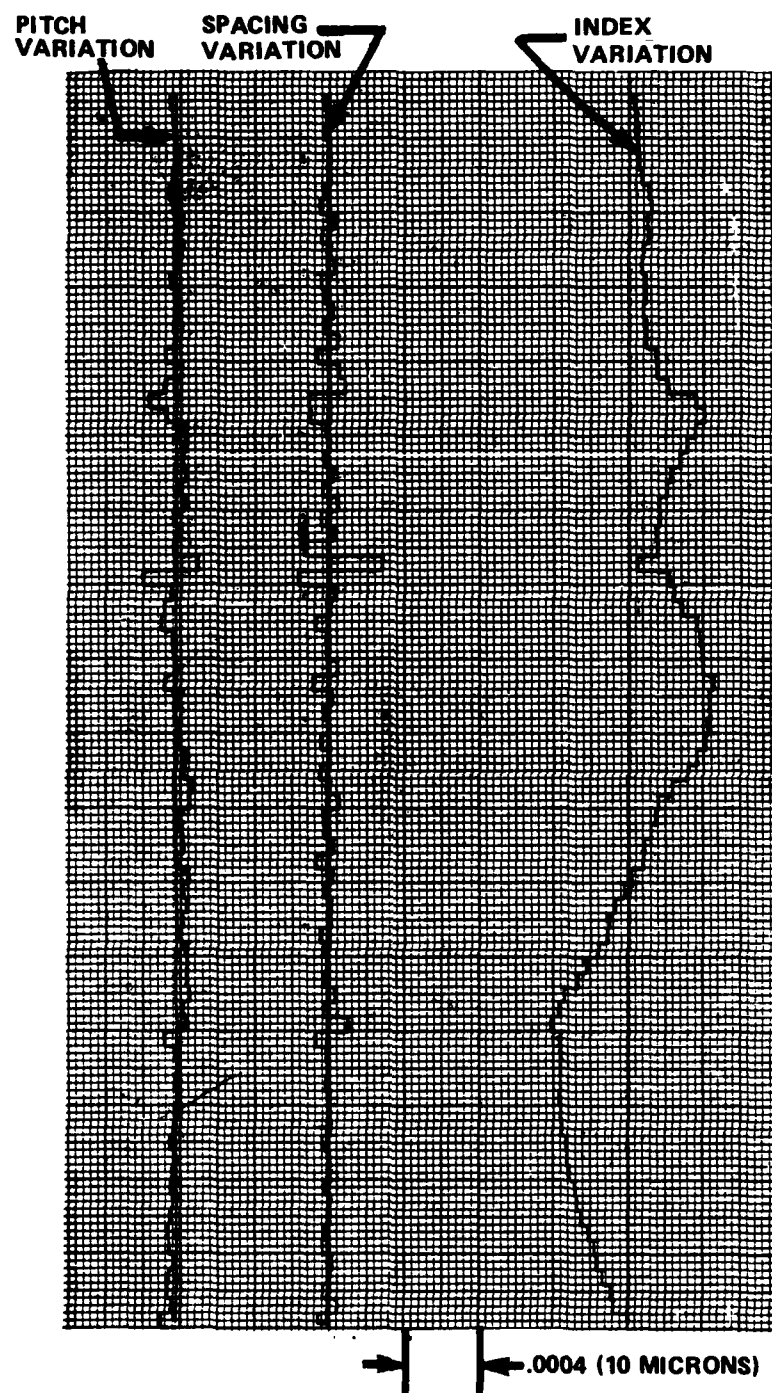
HCR Planet Gear Pitch, Spacing and Index (Drive Side/Ring Gear Mesh).
